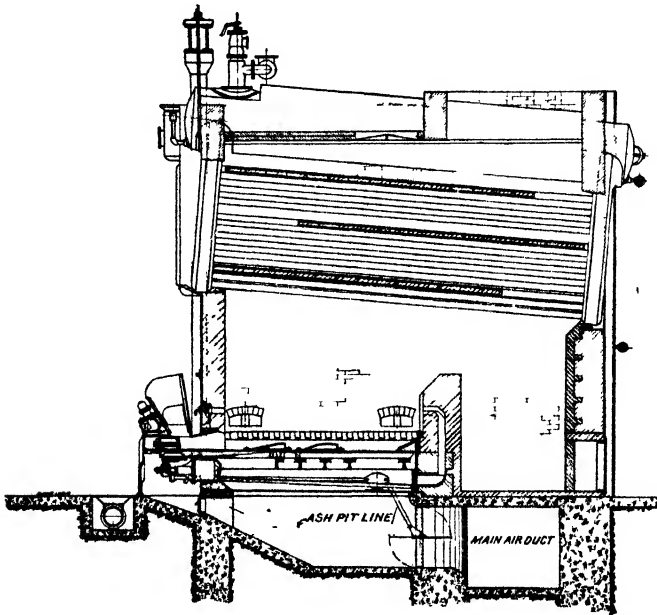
Type-E underfeed stoker applied to a Heine boiler. (*Combustion Engineering Corporation.*)
